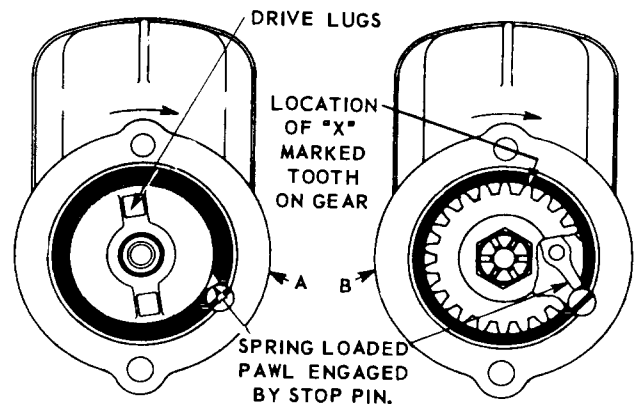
DRIVE GEAR TIMING MARK ASSEMBLY
